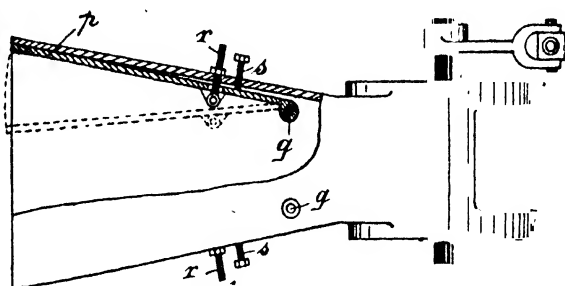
Arrangement of nozzle with variable opening. Plan and section.
